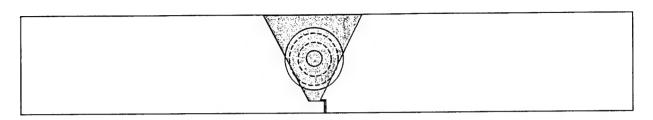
Single-V Joint Schematic With Longitudinal Specimen Orientation (Not to Scale).
